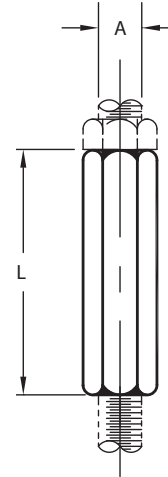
is used to connect rods up to 1½ inch diameter. The Rod Coupling is made of carbon steel and can be welded to the rod after assembly.
